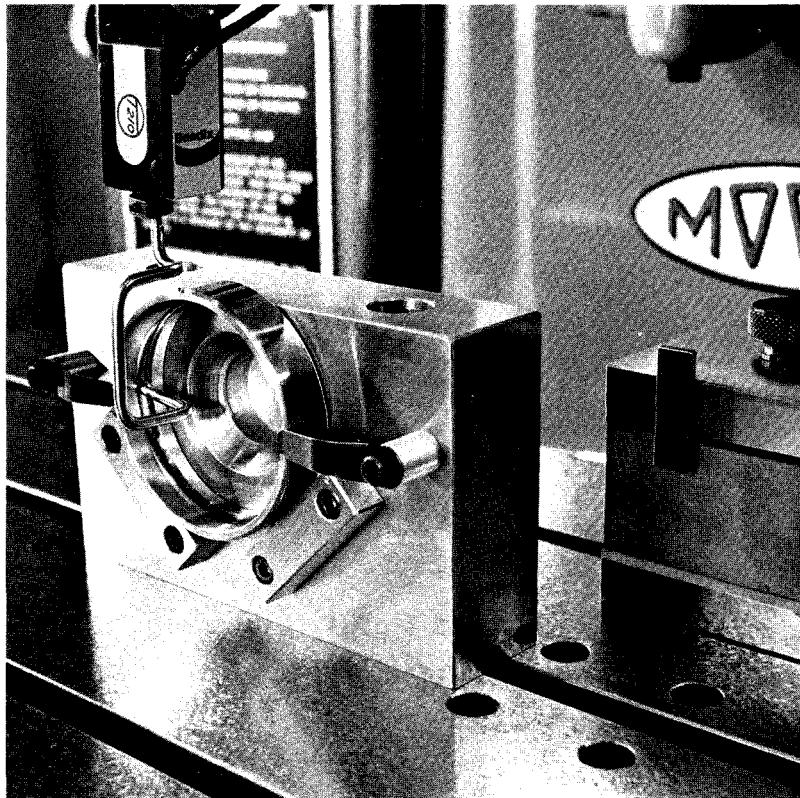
Roundness and size of a ball-bearing outer race are inspected on the Universal Measuring Machine.
